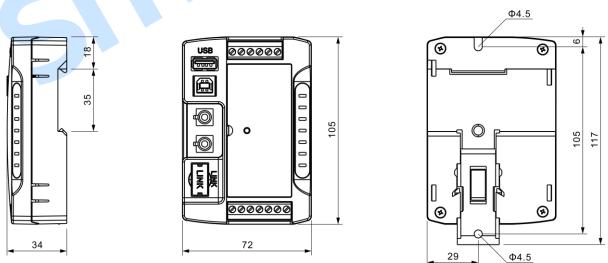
CMM366B-4G/CMM366CAN-4G Case Dimension
